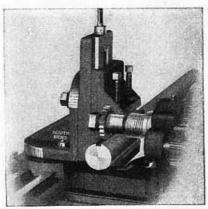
Milling a Keyseat in a Shaft on a 16-inch Lathe
